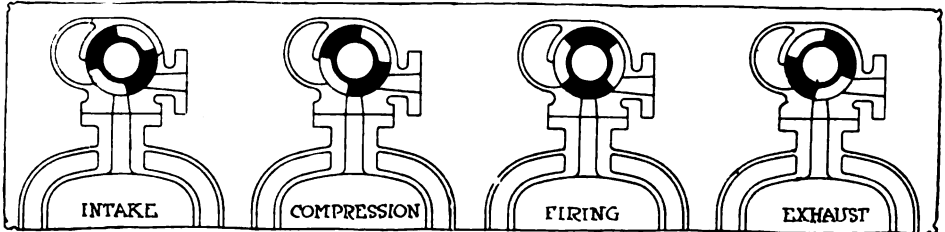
Positions of the rotary valve for Intake, compression, firing and exhaust
